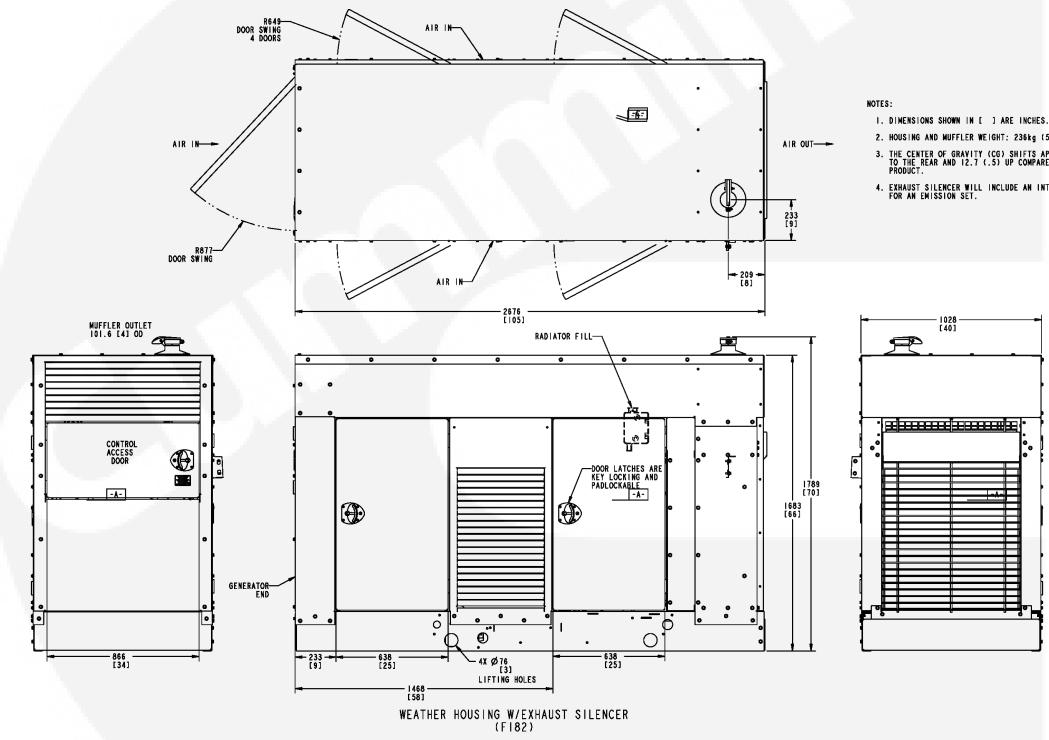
OUTLINE DRAWING - WEATHER HOUSED WITH EXHAUST (F182)
